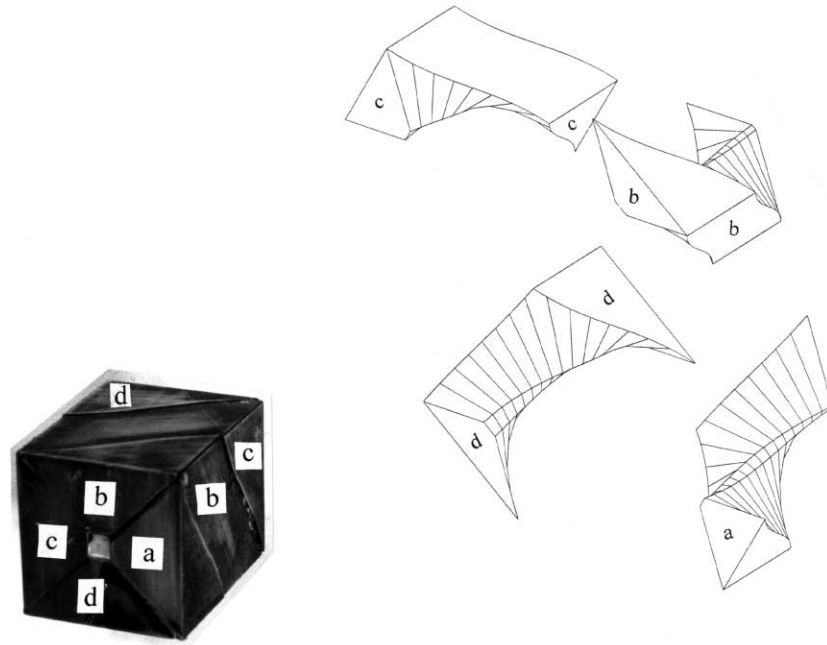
Spiralling die assembly block showing the four wall sections and spacer block and wall sections of spiralling dies assembly: (a) Helical Die A:90° wall twist (1.5°/mm) (b) Helical Die B:180° wall twist (3.0°/mm).
